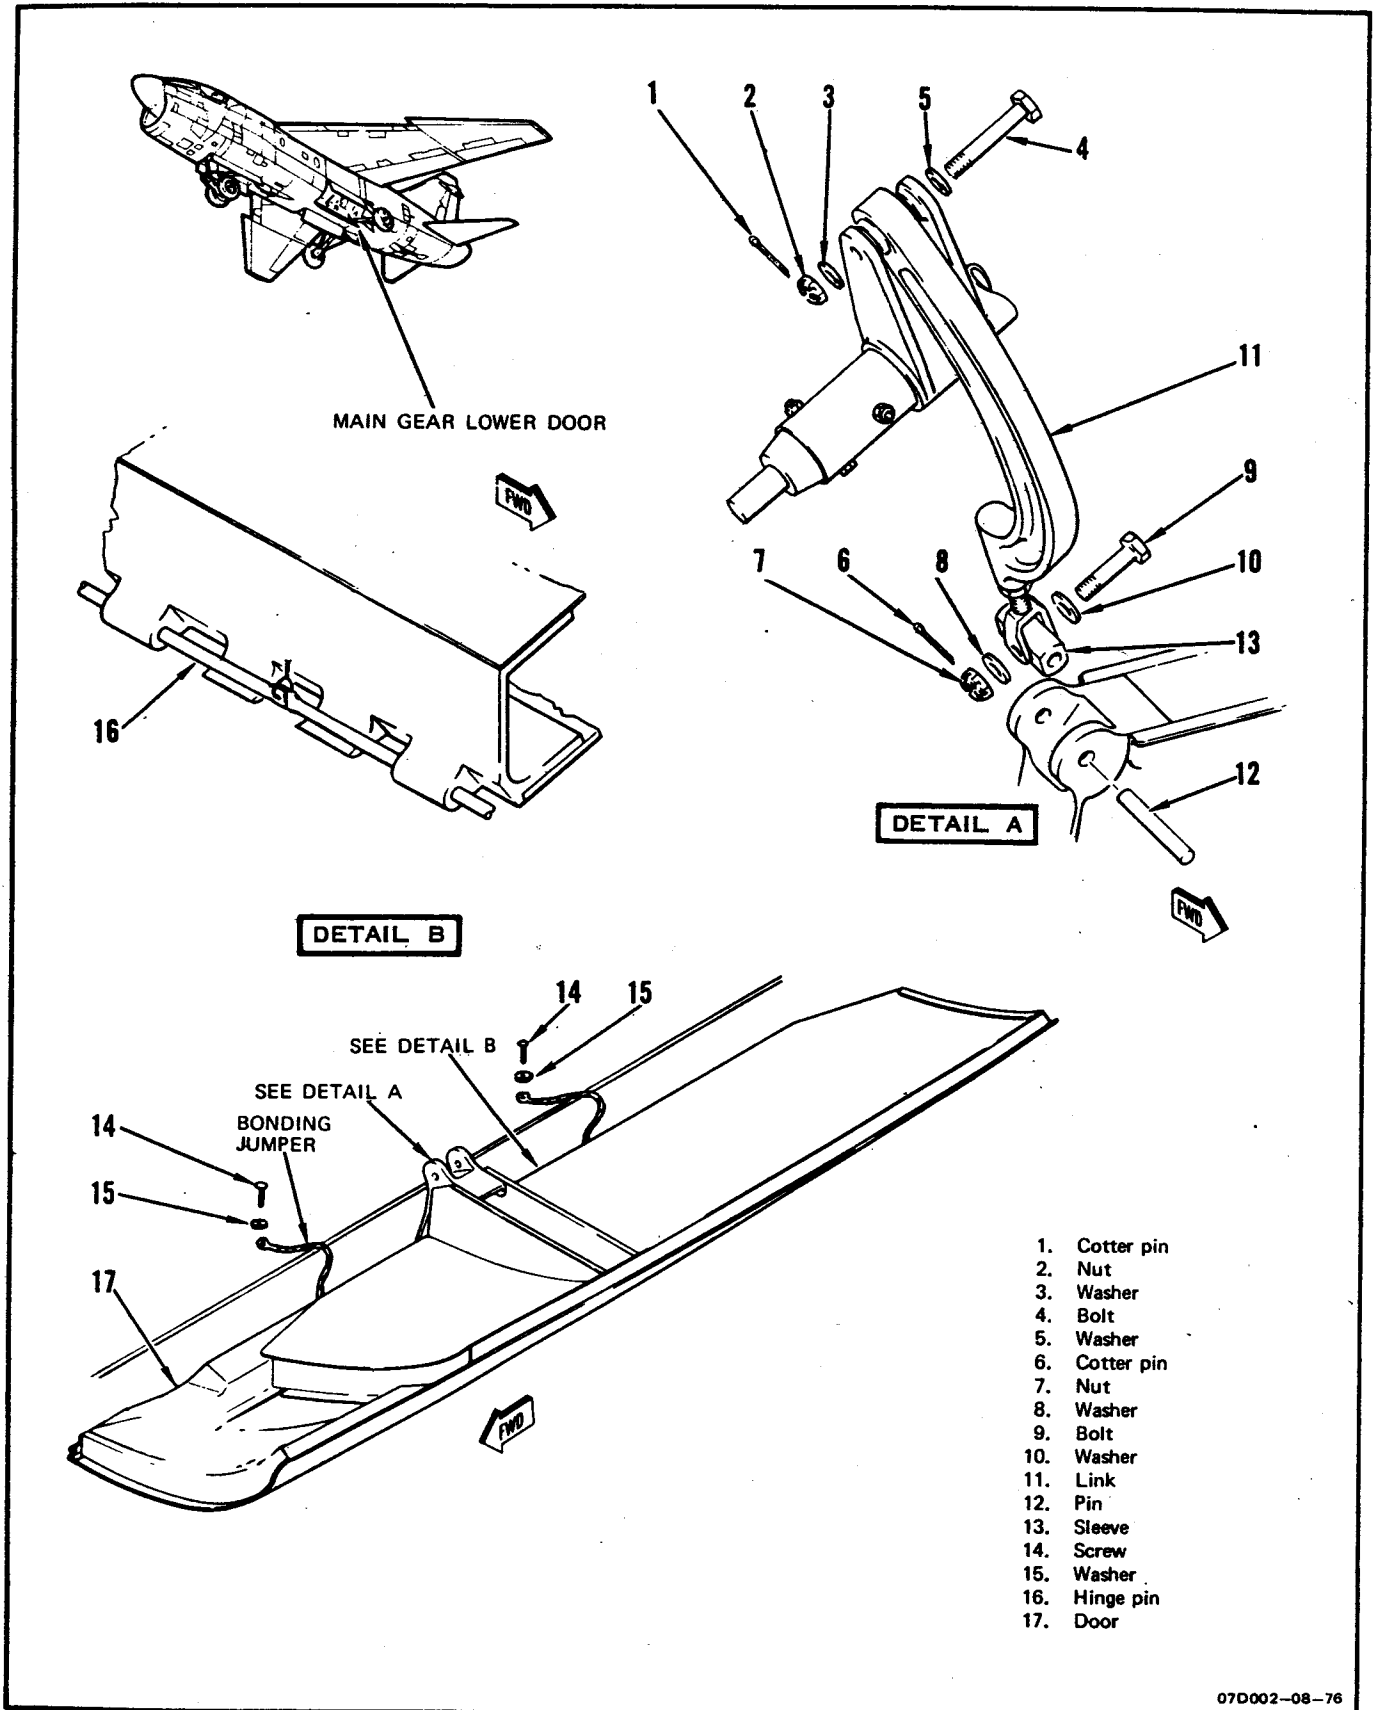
Main Gear Lower Forward Door Removal and Installation
